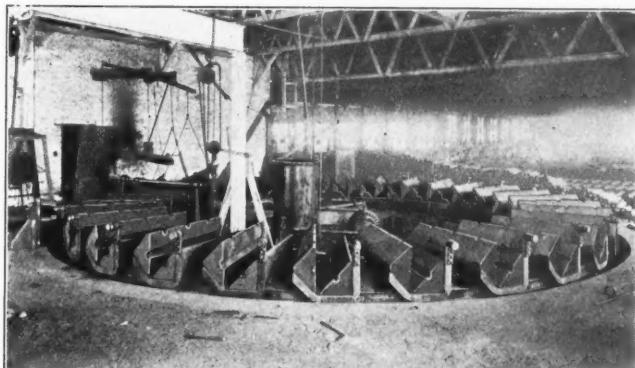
General View of Machine for Casting Pipe in Permanent Molds.
